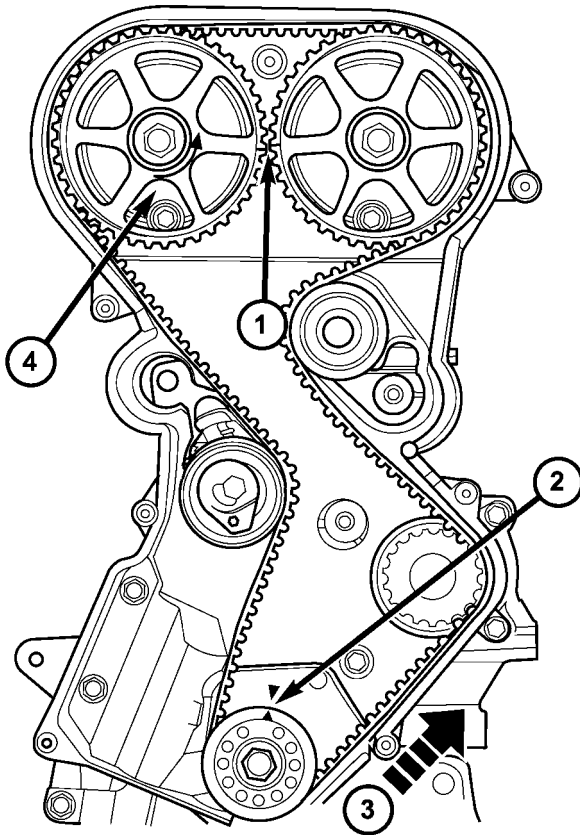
Camshaft Sprocket Alignment For Timing Belt Installation
